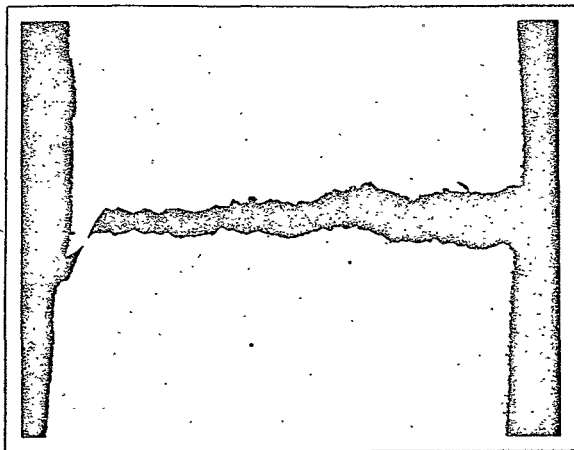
Unetched Cross Section Through Crack of Stainless-Steel Tube
